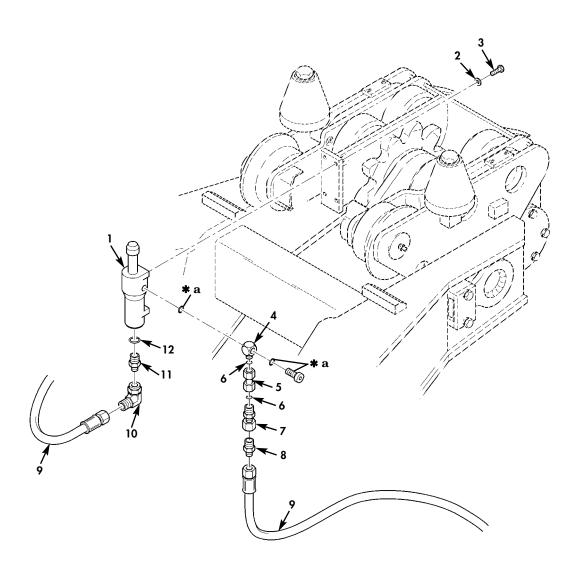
Pin Wheel Drive Gear, Front or Rear.
